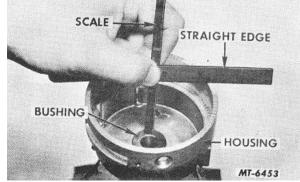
Using Straight Edge and Scale to Locate Upper Bushing in Distributor Housing
